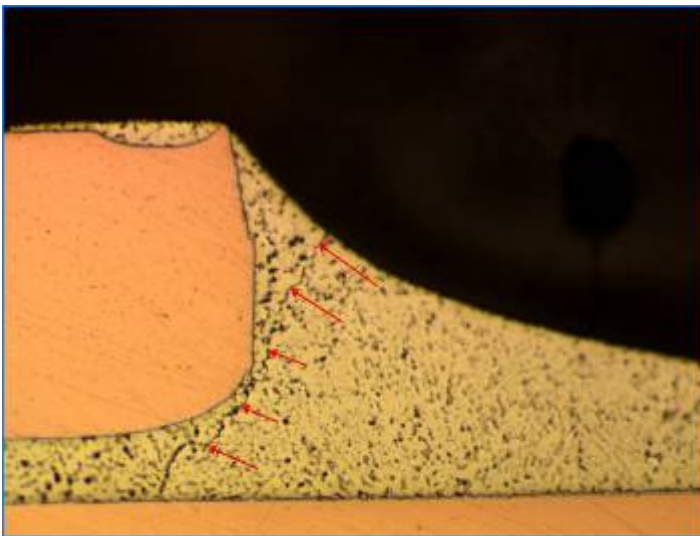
cross section, SN63, U54, right pad solder crack, 200x
